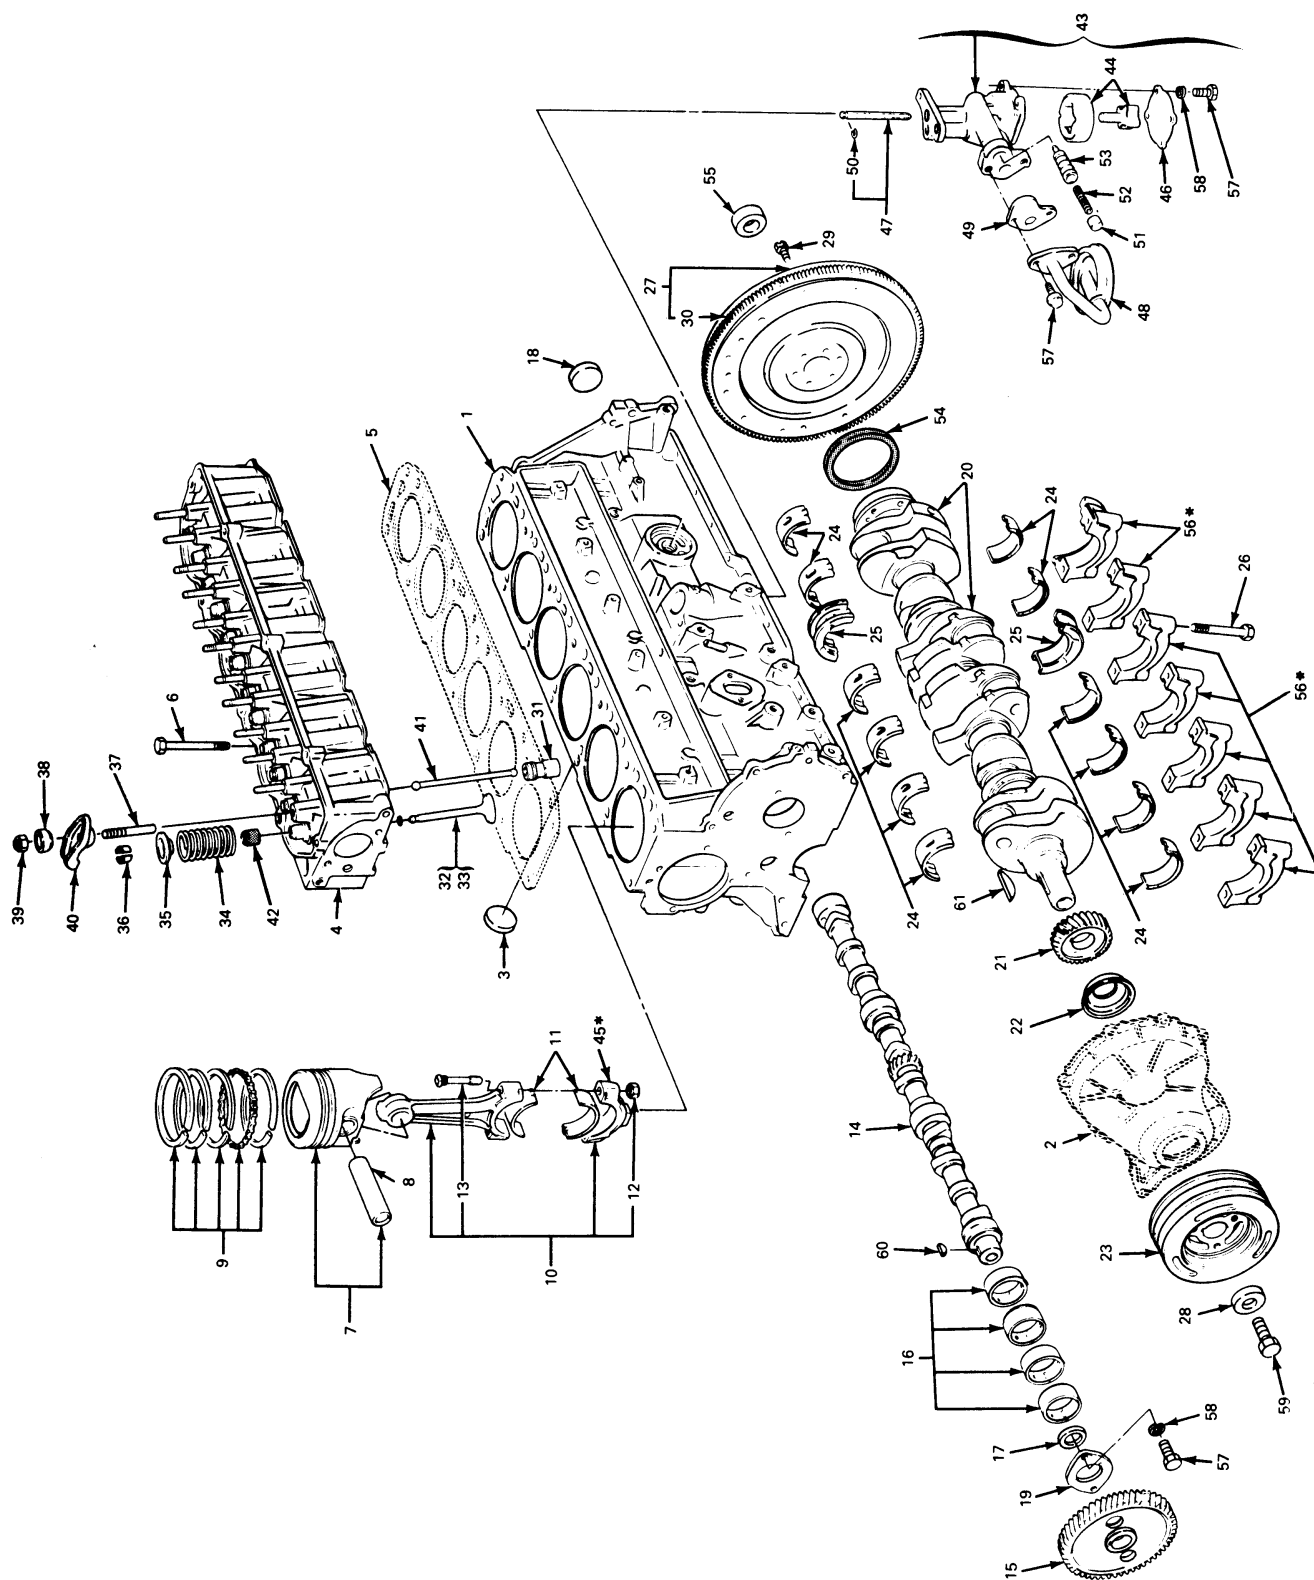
Internal Exploded View—4.9L (300 CID) I-6 Engine
